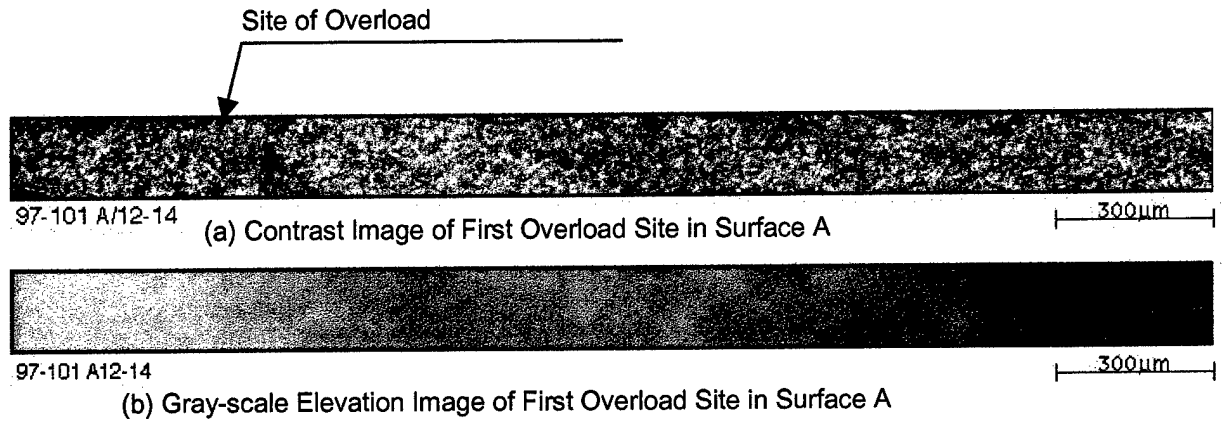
Contrast and gray-scale elevation images of fracture surface area surrounding overload site.
